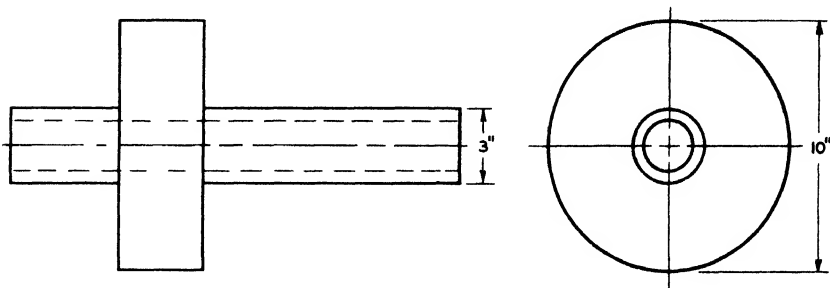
An Example of a Piece of Work Which Probably Could Be Done Most Efficiently by Using a Combination of Carbide-Tipped and Cast Alloys Tools
